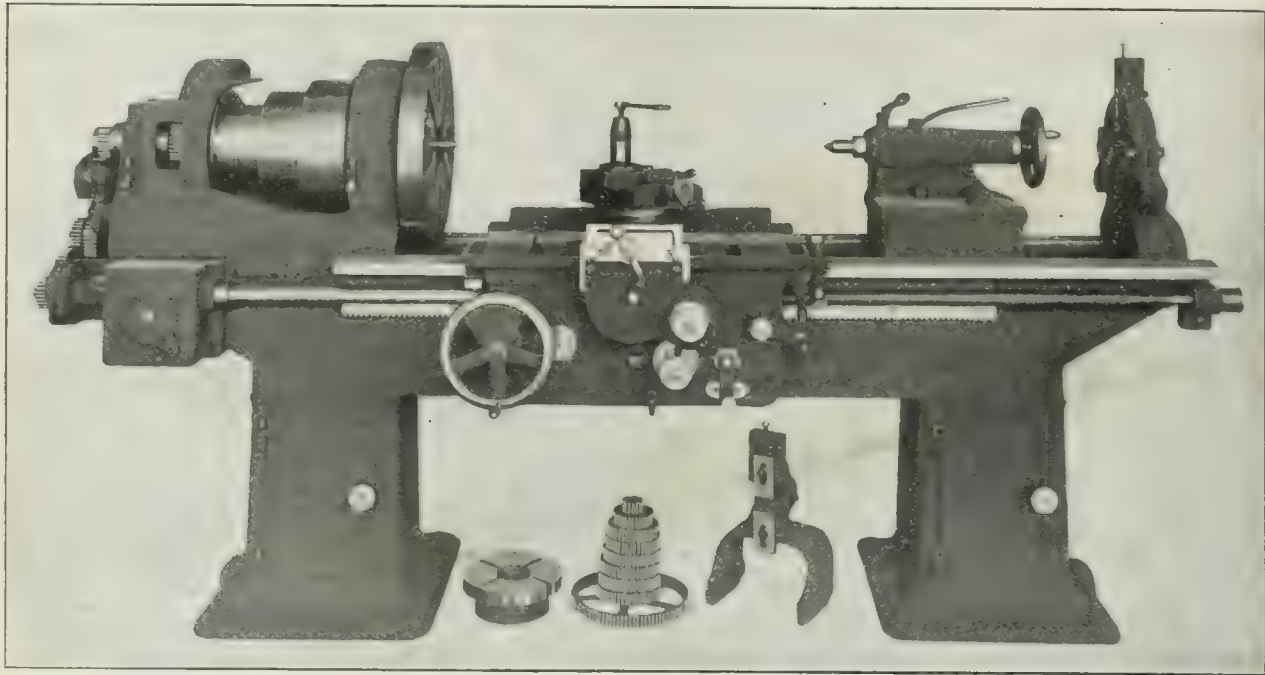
The 20-In. Cone Head Lathe Built by the John B. Morris Machine Tool Company, Cincinnati, Ohio.
